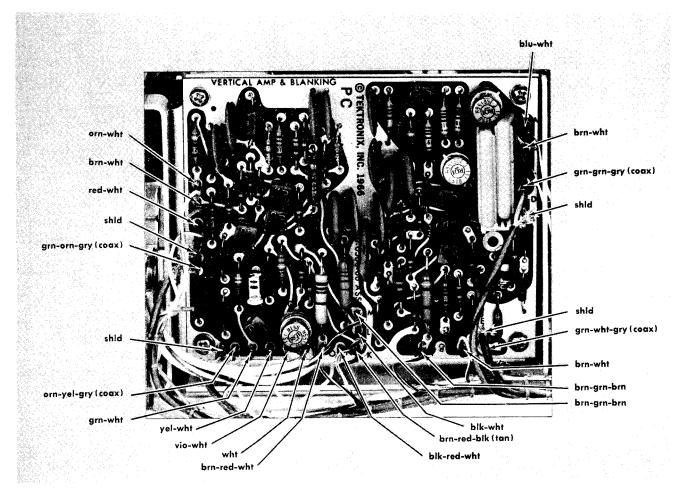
Vertical Amplifier circuit board with wiring color code to pin connectors.
